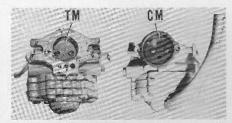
A-Punch marks on throttle (TM) and choke (CM) plates should be toward top and outside of carburetors.
